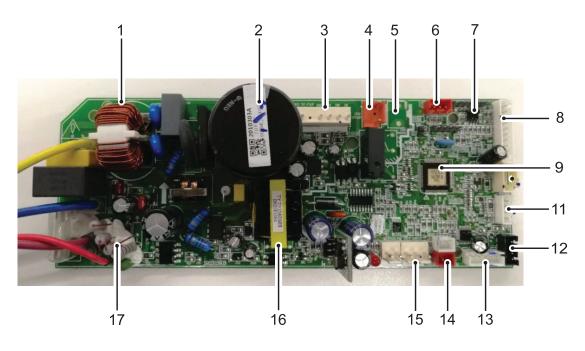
7k Indoor Unit Printed Circuit Board Identification
